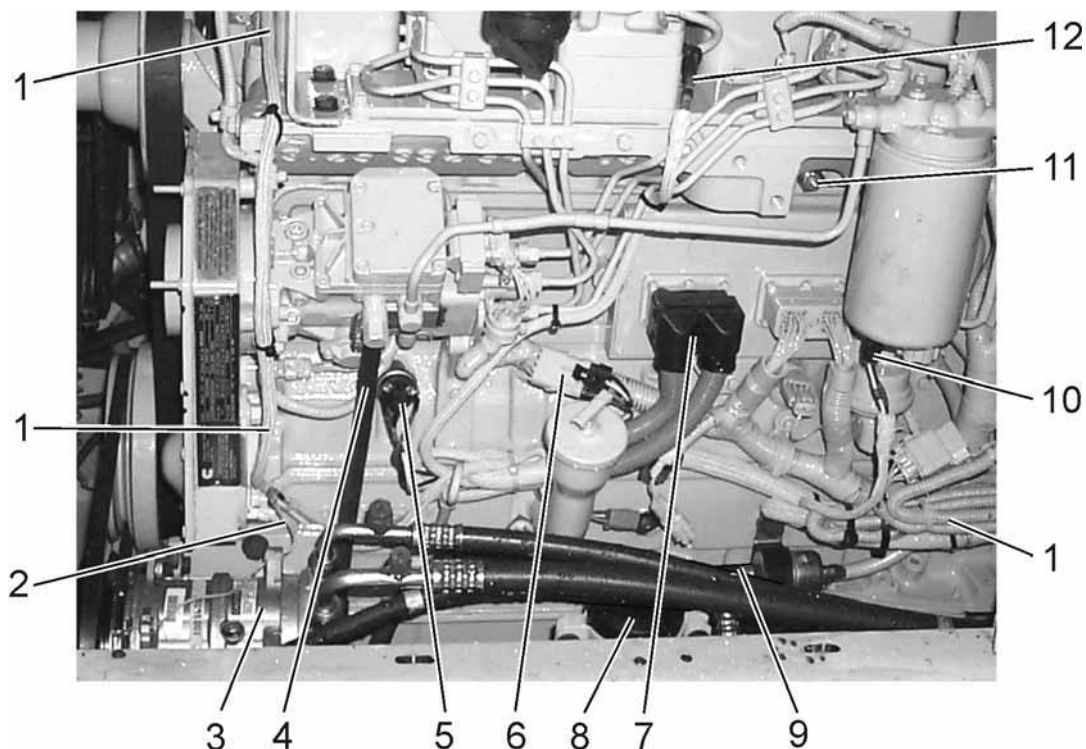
Engine Disconnecting Points (515G RH Side)
